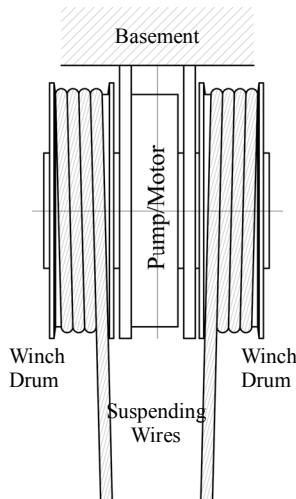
Concept of Suspending Spring using Hydraulic Pump/Motor, Single Layered Winch Drum, and Suspending Wires
